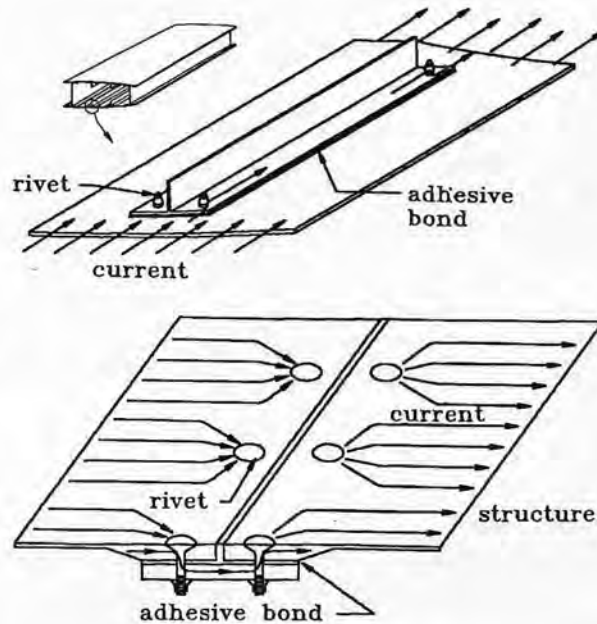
Current carrying paths added to adhesively bonded joints.
